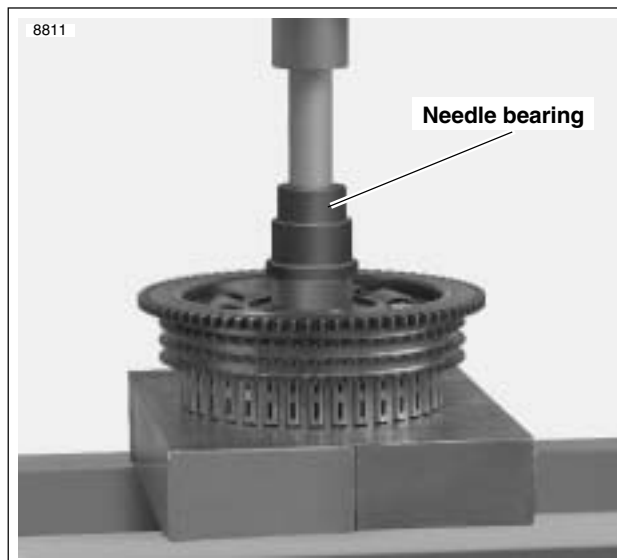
Installing Clutch Shell Needle Bearing Clutch Shell Bearing Remover/Installer B-45926
